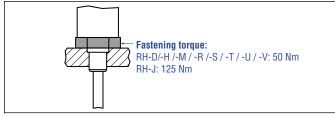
Mounting example of threaded flange »D«, »H«, »J«, »M«, »R«, »S«, »T«, »U« & »V«
